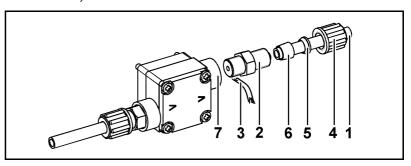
4/6 hose / cutting ring FT connection fitting
